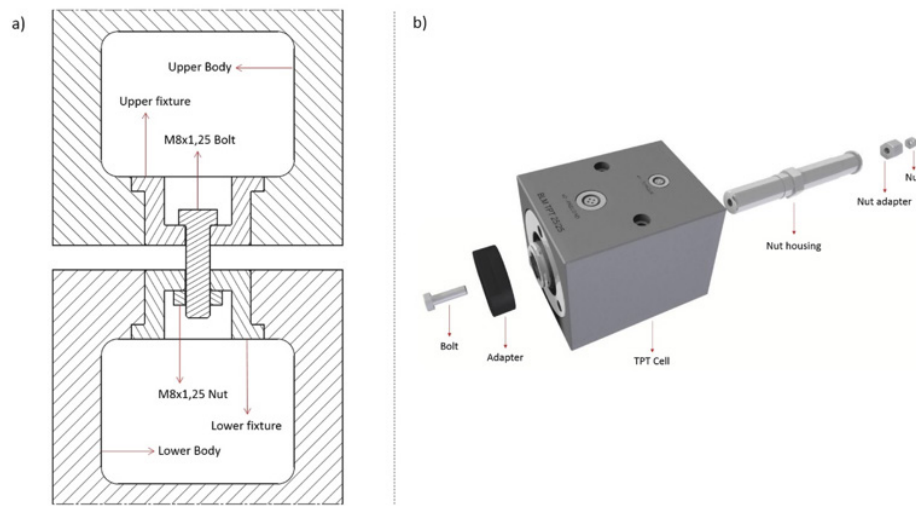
(a) Fatigue test setup; (b) Torque-Tension test setup
